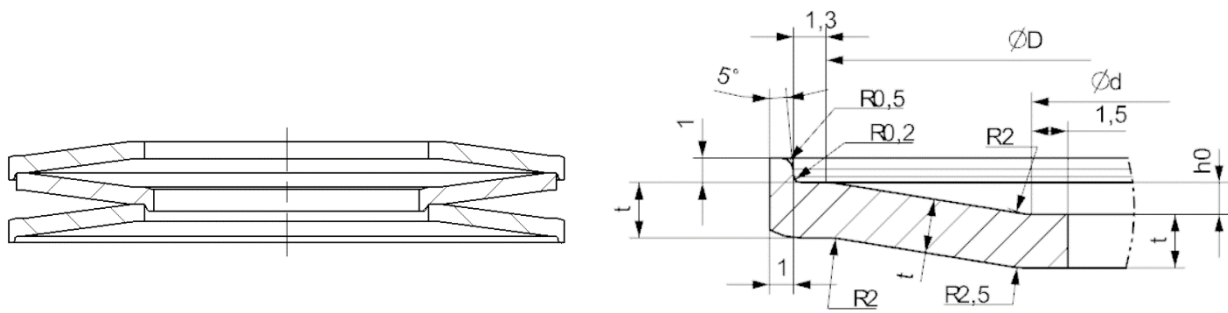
The serial arrangement of discs (left); Disc with outer flange – basic dimensions (right)
